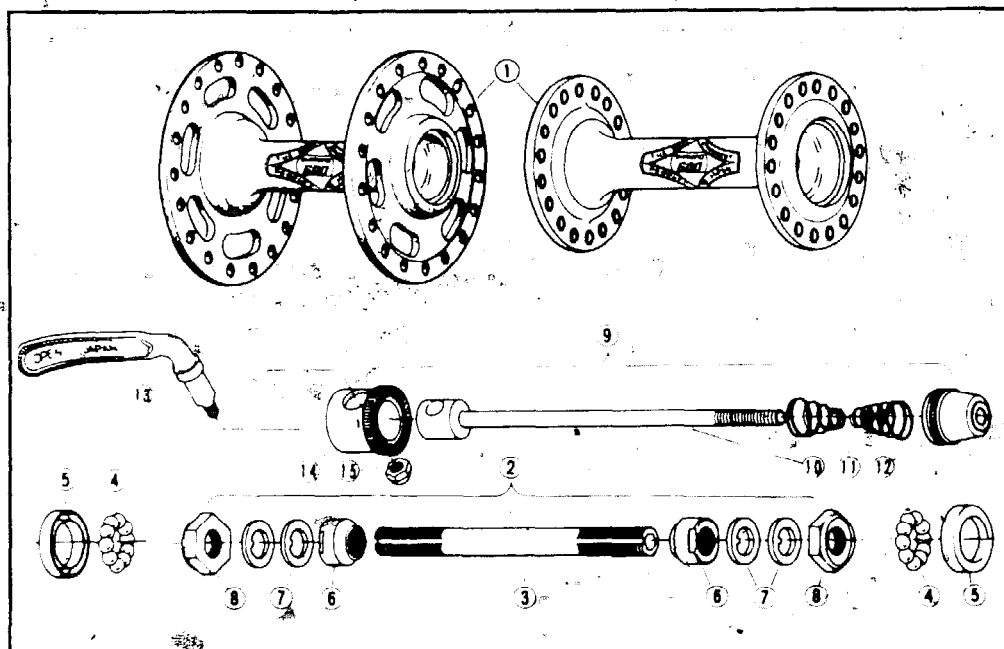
Shimano 600 front hub with quick release. Parts are: (1) hub shell—large and small flange models shown, (2) complete axle set, (3) axle, (4) bearings, (5) dust cap, (6) cone, (7) key washer, (8) lock nut, (9) complete quick release unit, (10) skewer, (11) volute spring, (12) nut for skewer, (13) cam lever, (14) body cam lever, and (15) cap nut.
